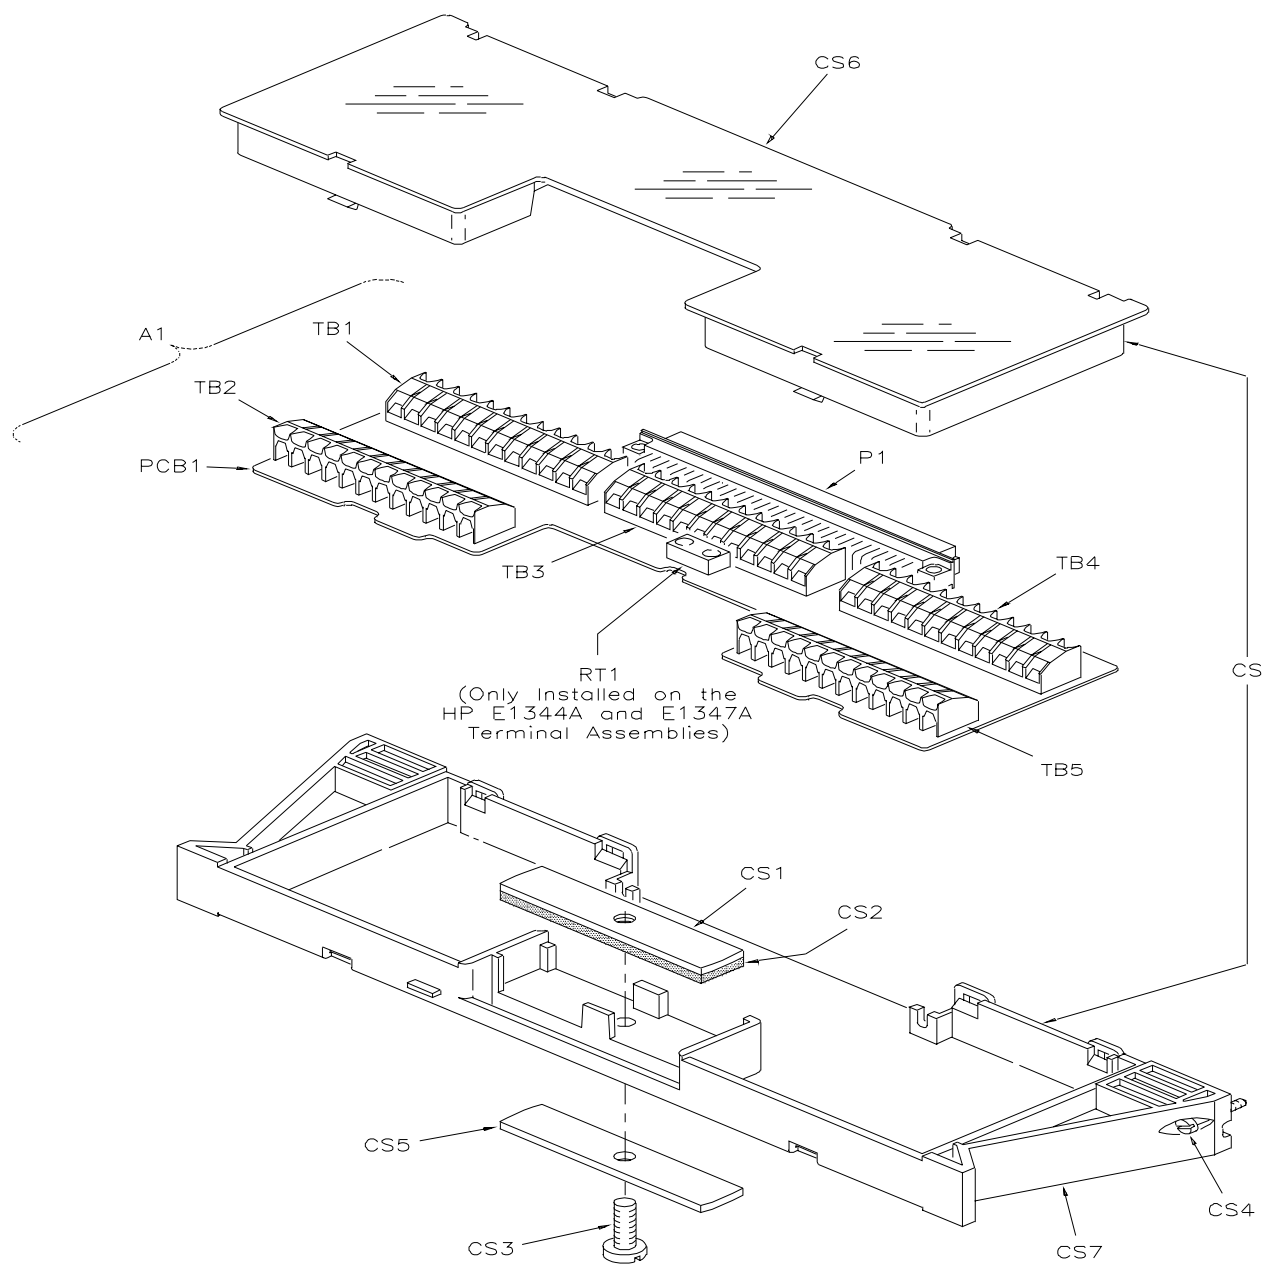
E1343A/44A/45A/47A Terminal Module Mechanical Parts
